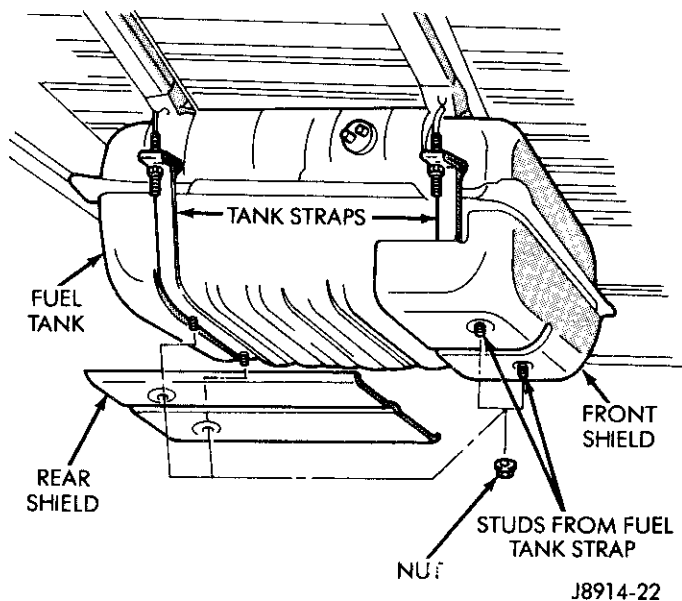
Fuel Tank and Shield—Short Bed Comanche without Skid Plate
